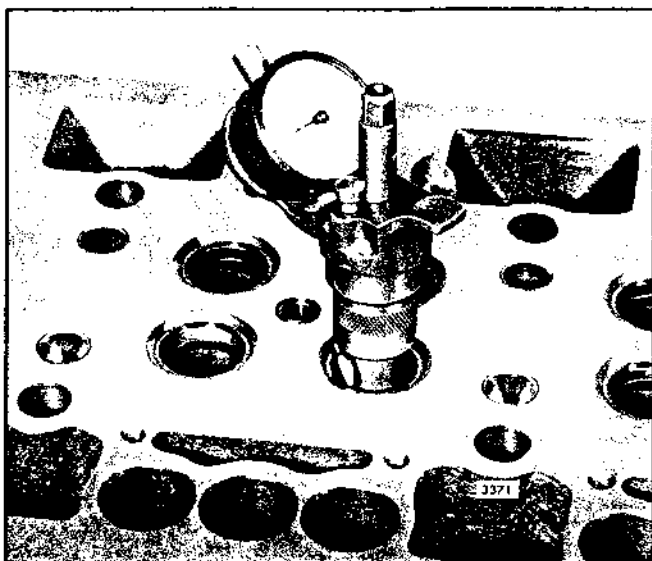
Checking Relative Concentricity of Valve Seat Insert with Relation to Valve Guide
